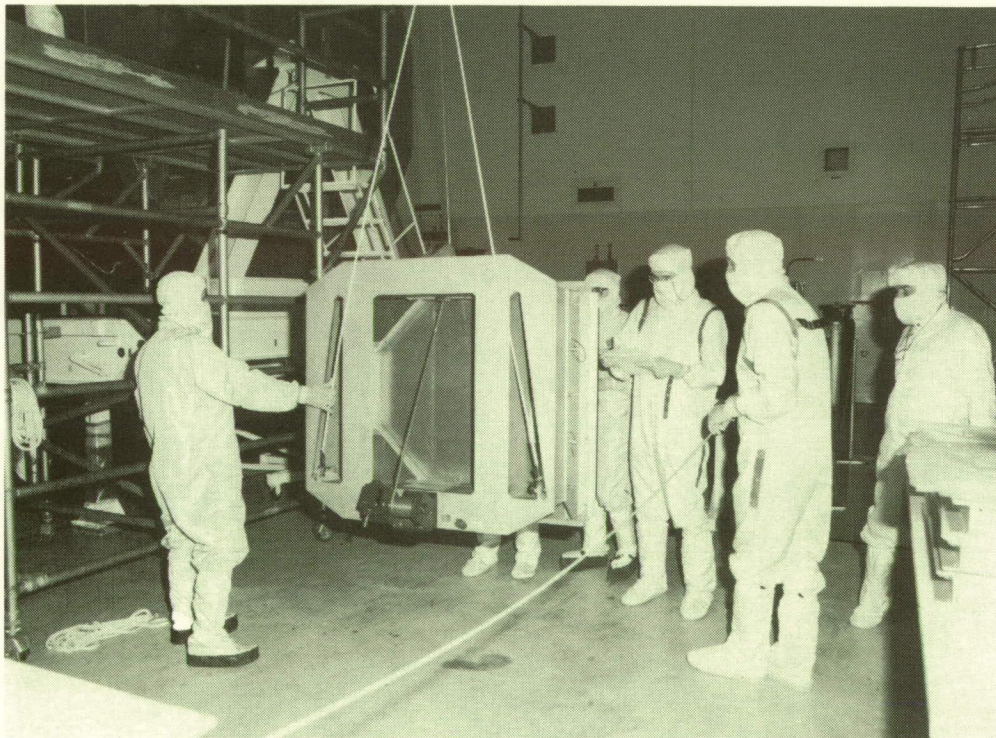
Tray being inspected prior to being placed on rotator. (Photo L-90-03082)
